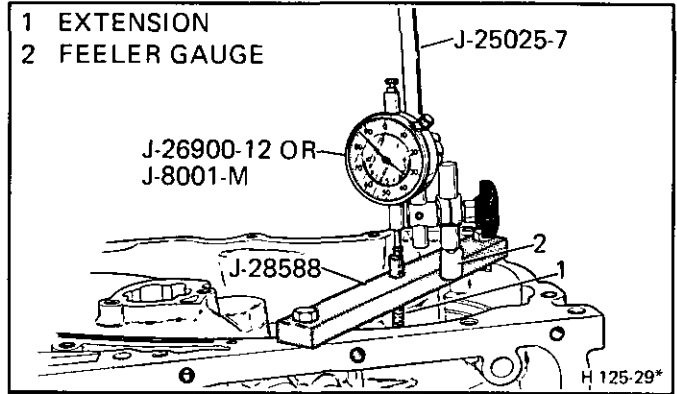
Selective Snap Ring End Play (Sun Gear/Input Drum)
